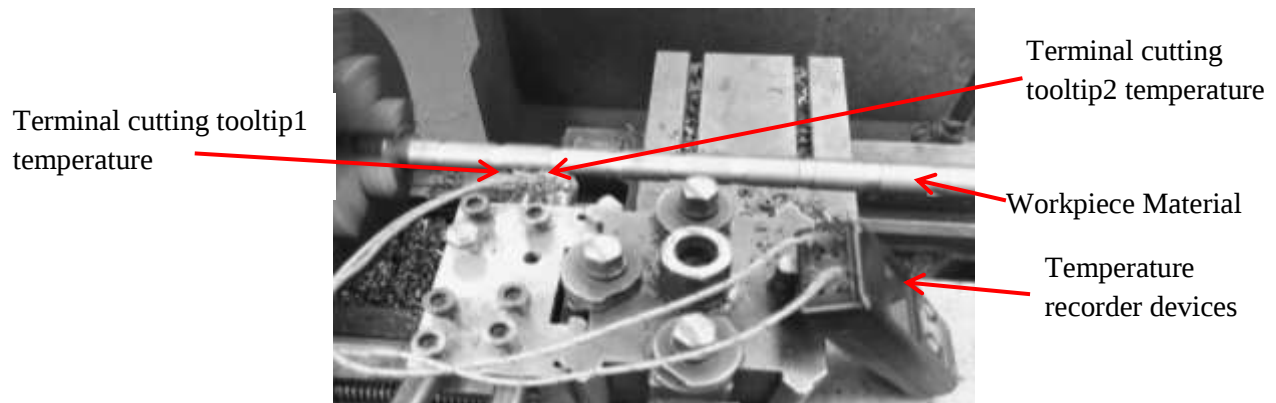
Cutting Tooltip Temperature Measurement Setup
